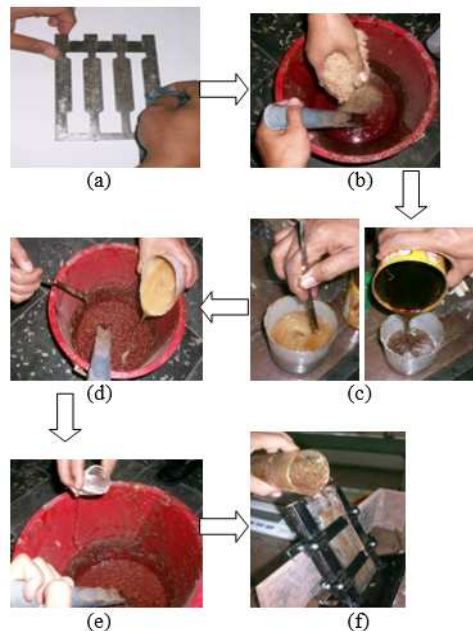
The process of making test specimens: (a) giving a separation layer; (b) Mixing Resin and OPEFB fibers (C1); (c) Giving PU; (d) Mixing C1 and C2 solutions; (e) Giving a catalyst; and (f) Cast into the specimen mold.
